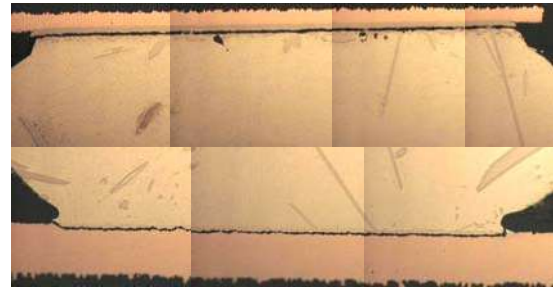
SAC405 solder joint failure in shock conditions
